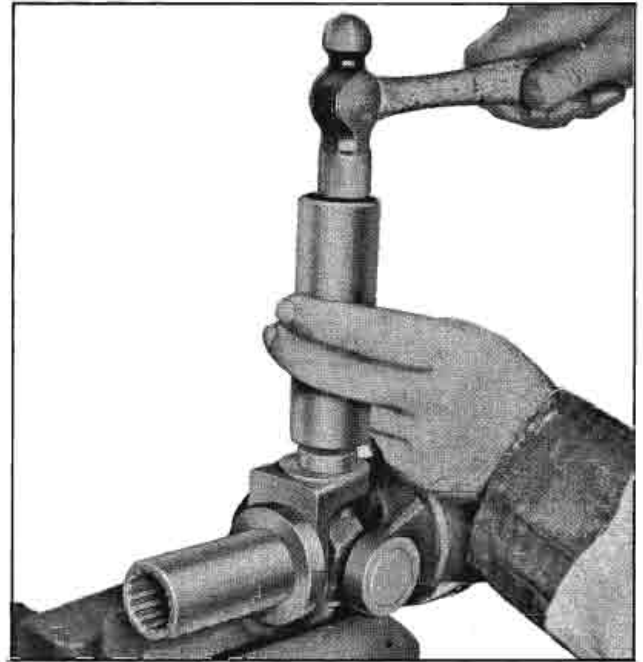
A-5 Removing Bearing From Splined Yoke Member
